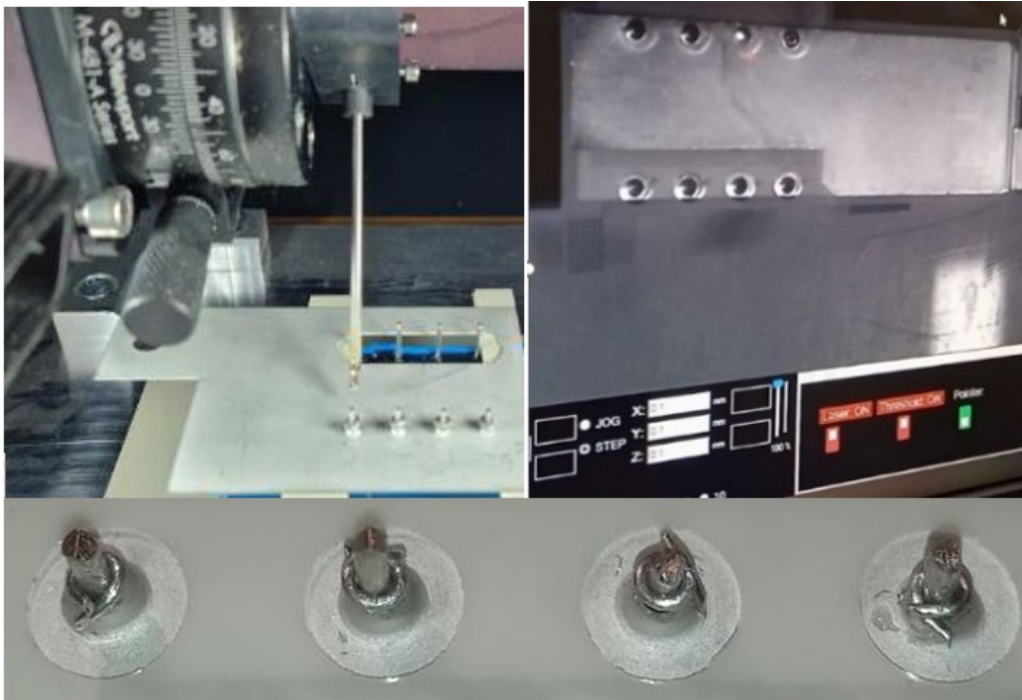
Equipment used for laser soldering (upper left). During soldering (upper right). Prototypes of soldering tin preforms deposited around the lead wire (Step 4), just before soldering (bottom).
